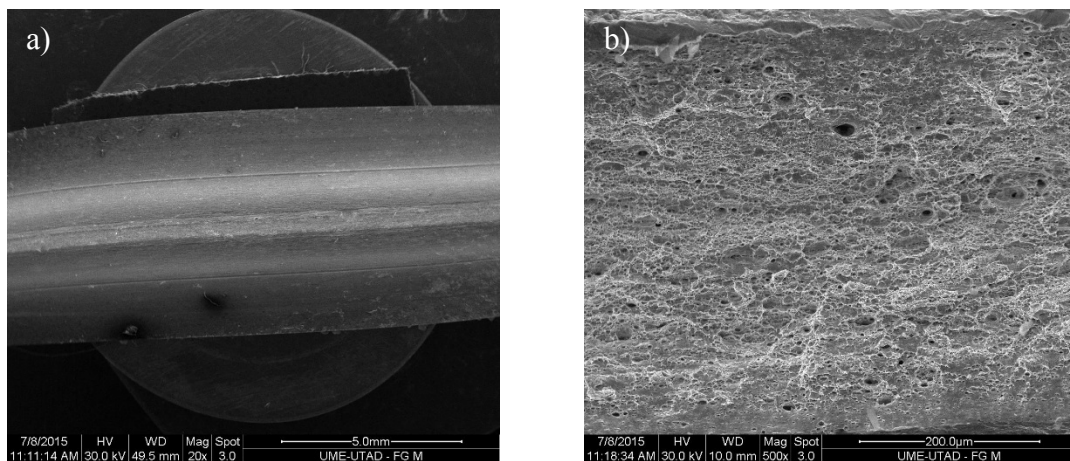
Fracture surface of a flat-grooved specimen of X60 piping steel: a) general view; b) detail view of material porosity.
